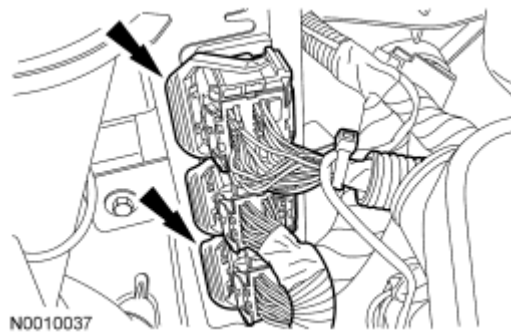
Identifying Upper & Lower Powertrain Control Module (PCM) Electrical Connectors
